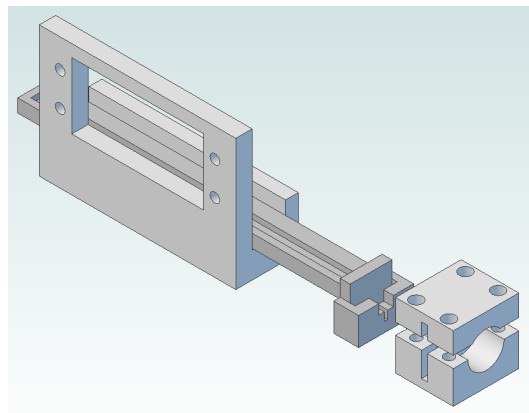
Drawing of the 3D printed syringe pump components. A servo motor actuates the slide attached to the syringe piston while the syringe body is clamped in place.
